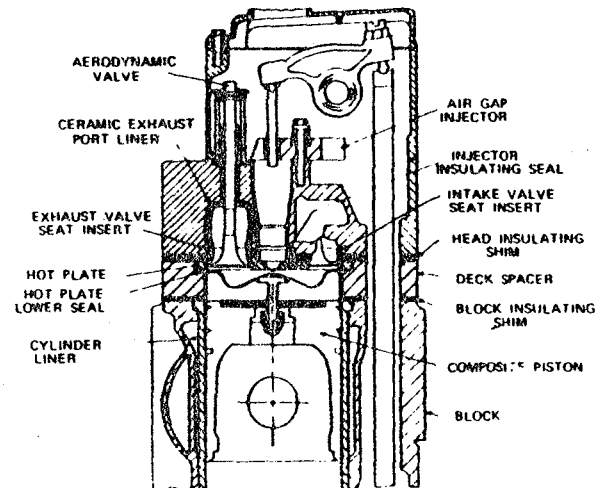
Cross section of the TACOM/Cummins insulated diesel engine
